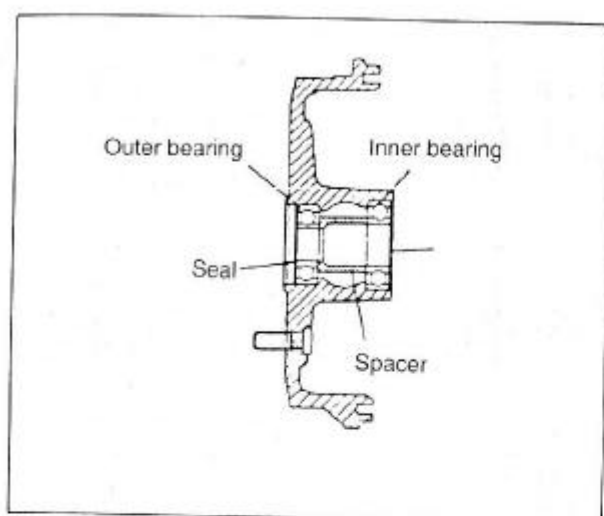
E — 11 DIRECTION OF BEARING AND SEAL
